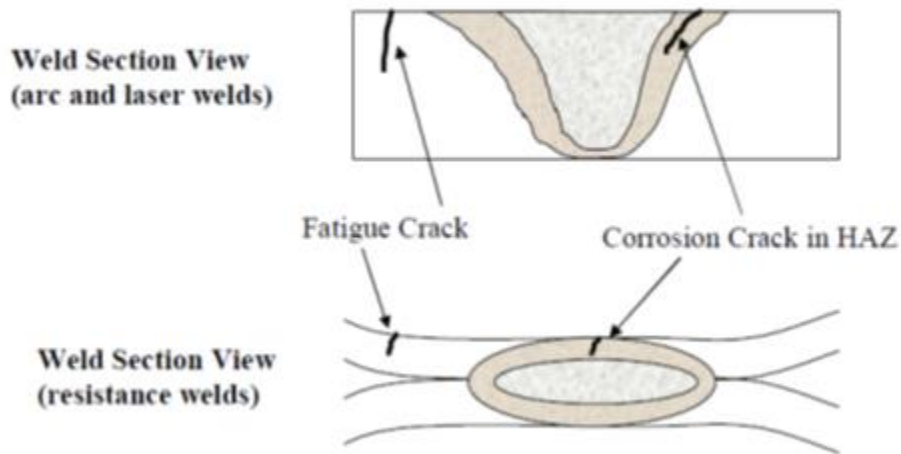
Schematic showing location of fatigue and corrosion crack in and near welds
